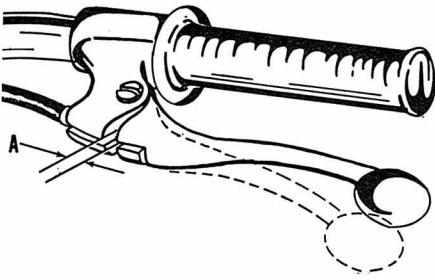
The clutch should be adjusted to provide  $\frac{1}{16}$ – $\frac{1}{8}$ -inch free play at (A).
